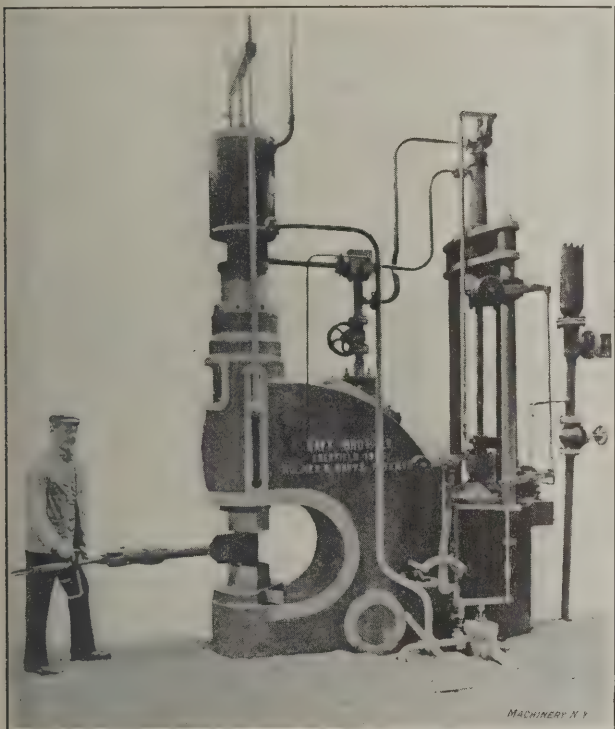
Smaller Size Hydraulic Action Forging Press.
